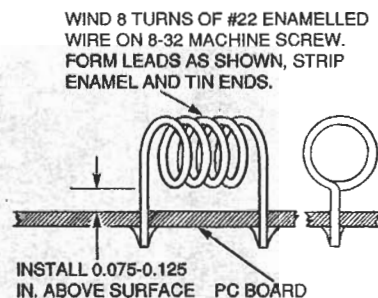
COIL L2 FORMING and installation details. Wind 8 turns on 8-32 machine screw to form coil L2. Do not remove screw until after installation on PC board.
